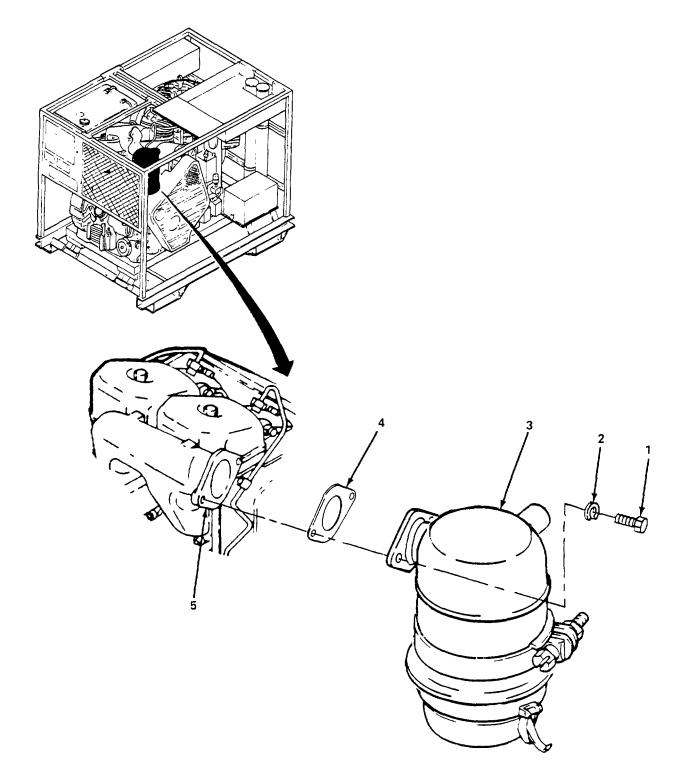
Oil Bath Air Filter Assembly, Replace.
